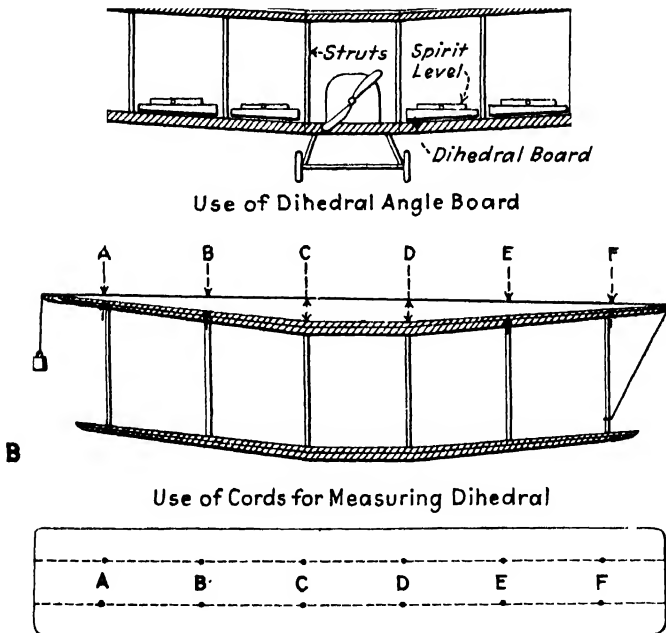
Use of Dihedral Board Shown at A. Checking Dihedral by Measurements Shown at B.
